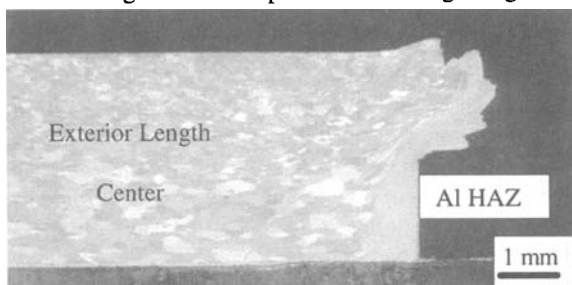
Control sample metallographically prepared in CMR hot cells. Solid inertia welded piece machined to simulate irradiated sections.
